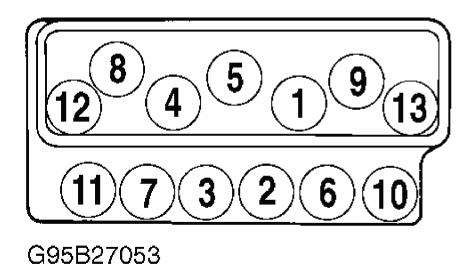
Cylinder Head Bolt Tightening Sequence Courtesy of GENERAL MOTORS CORP.
